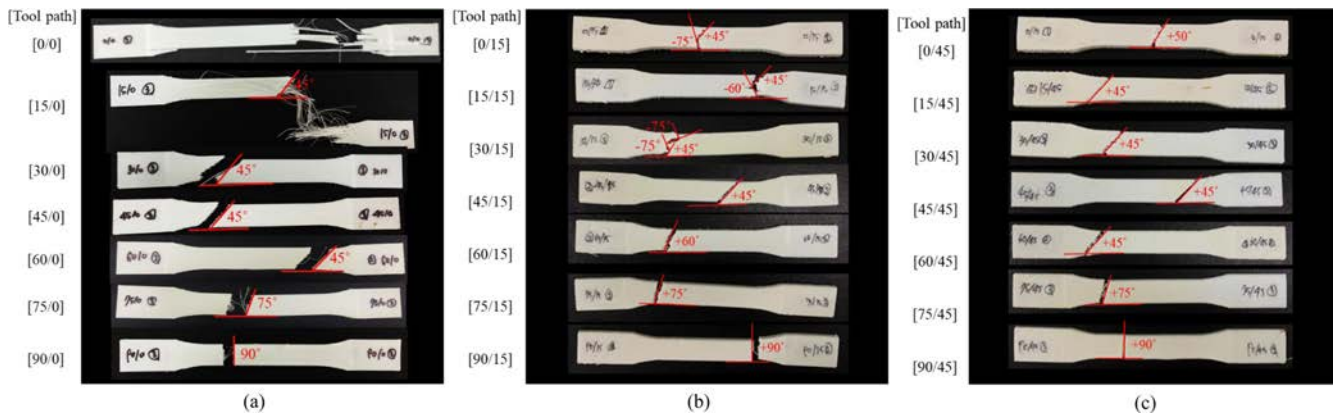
Fractured tensile specimens and fracture angle: (a) asymmetric tool paths (A/0); (b) asymmetric tool paths (A/15); (c) asymmetric tool paths (A/45).
